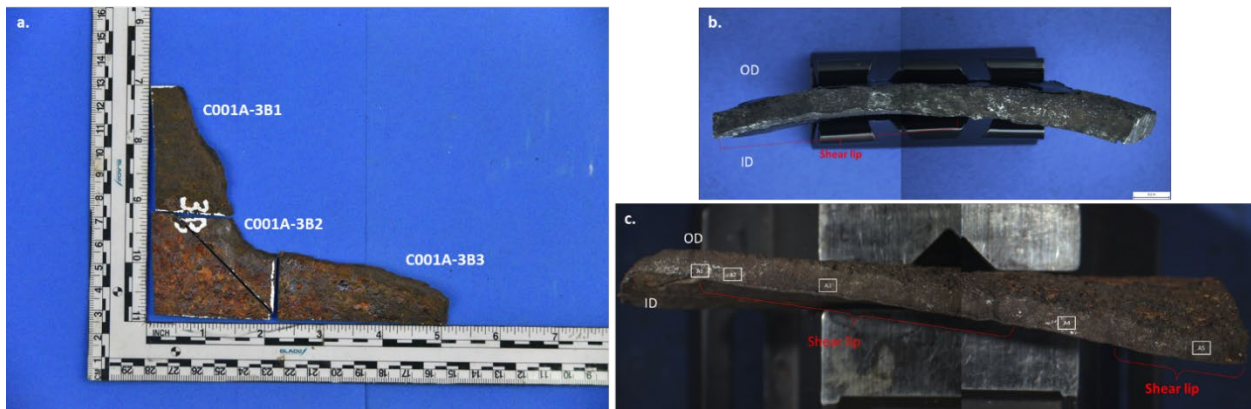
a. C001A-3B Cut Specimens, b. C001A-3B1 Fracture Surface, and c. C001A-3B3 Fracture Surface
